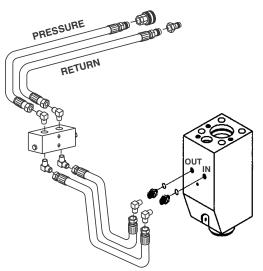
AR-Typical Mini-Ex Connecting Hydraulic Lines
